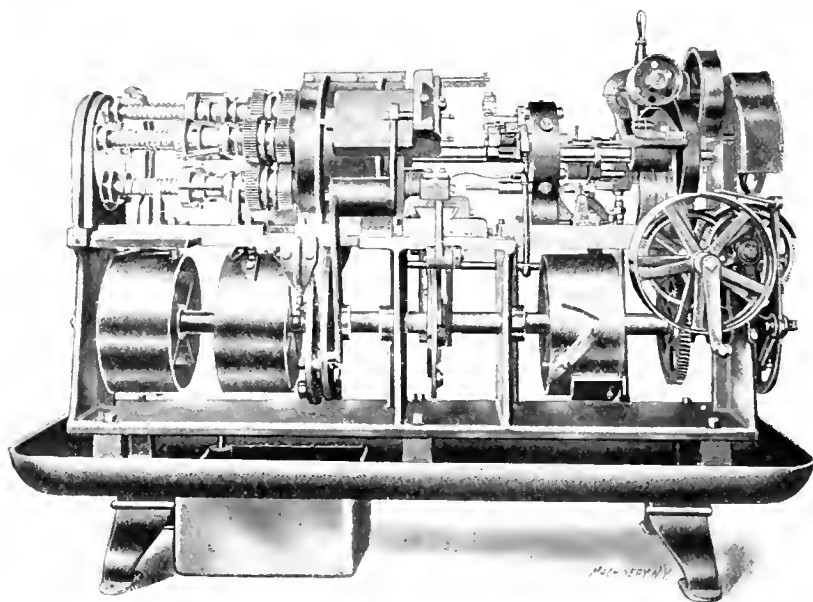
Improved Design of the Universal Multiple Spindle Automatic Screw Machine.
